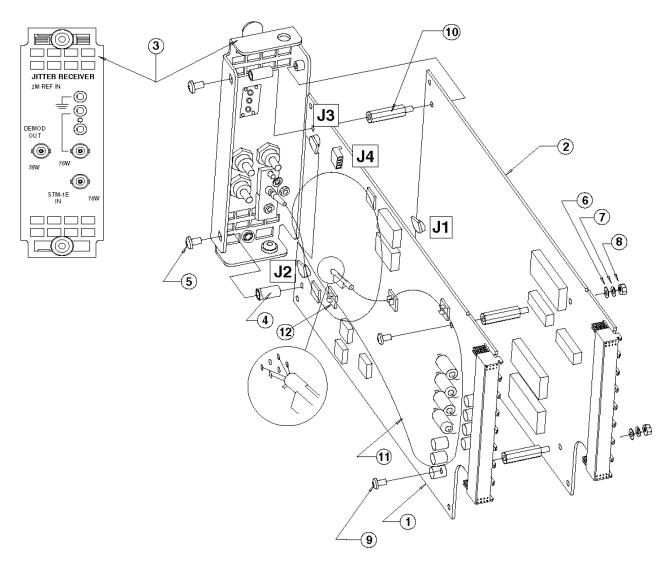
STM,1/4-e/o Jitter Rx Module - Exploded View
